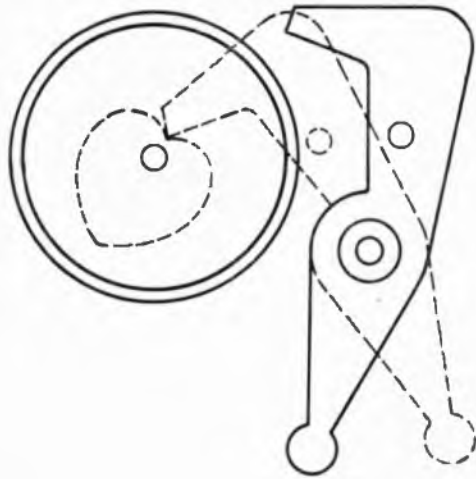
HEART-SHAPED CAM AND LEVER.
